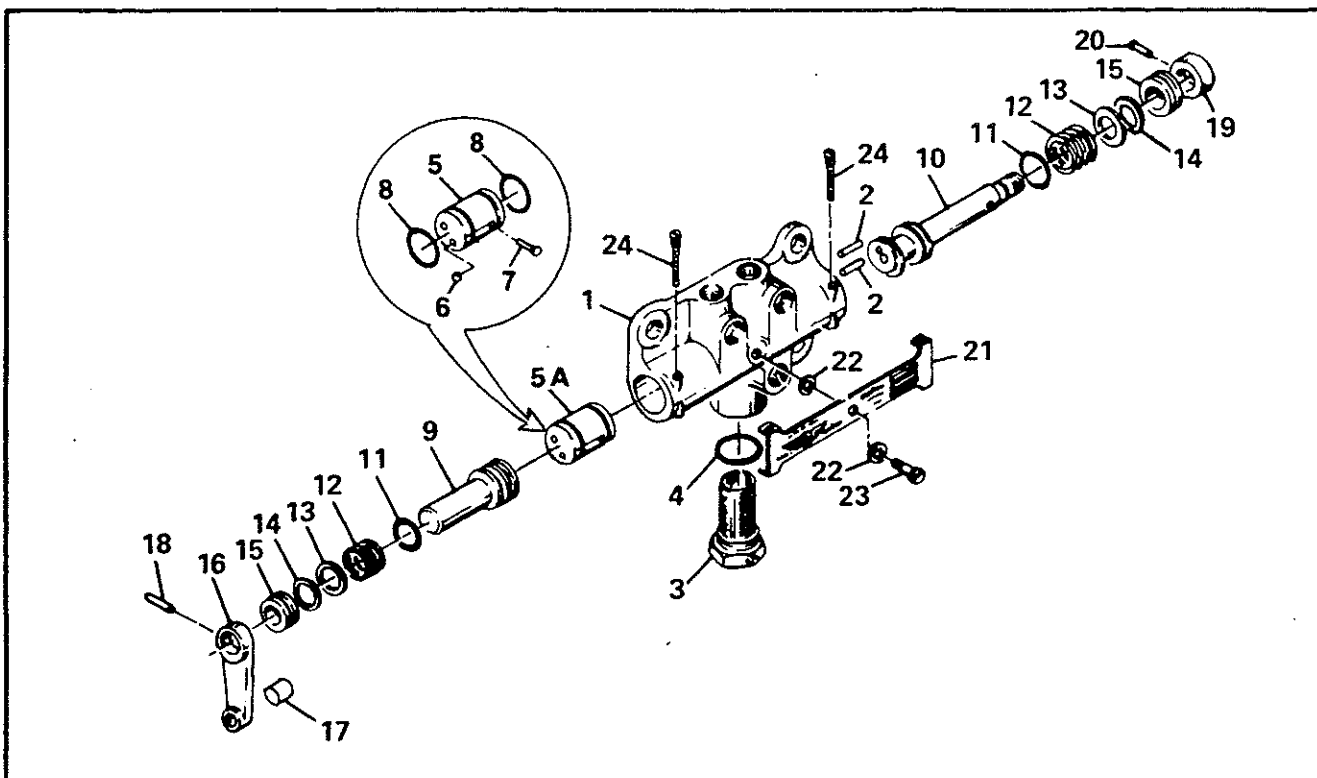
FUEL CONTROL ASSEMBLY.
